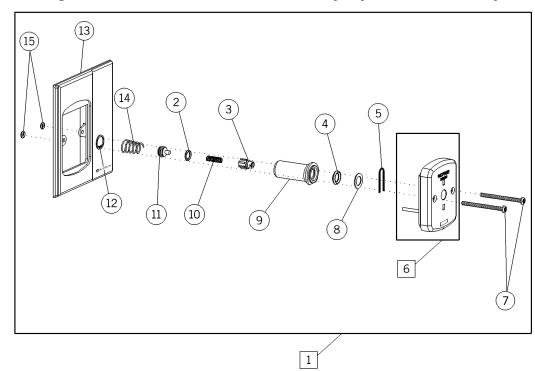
Diamond® Quick-Connect Key Style Finish Assembly
